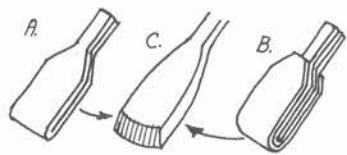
Forming the boat spade iron. A "thin" spade (A) is shaped from a piece of doubled-over sheet copper (soldered at the seam); a "thick" spade is made of four sheets doubled over a single sheet for a total of five layers, then soldered (B). The result in either case should resemble C.
